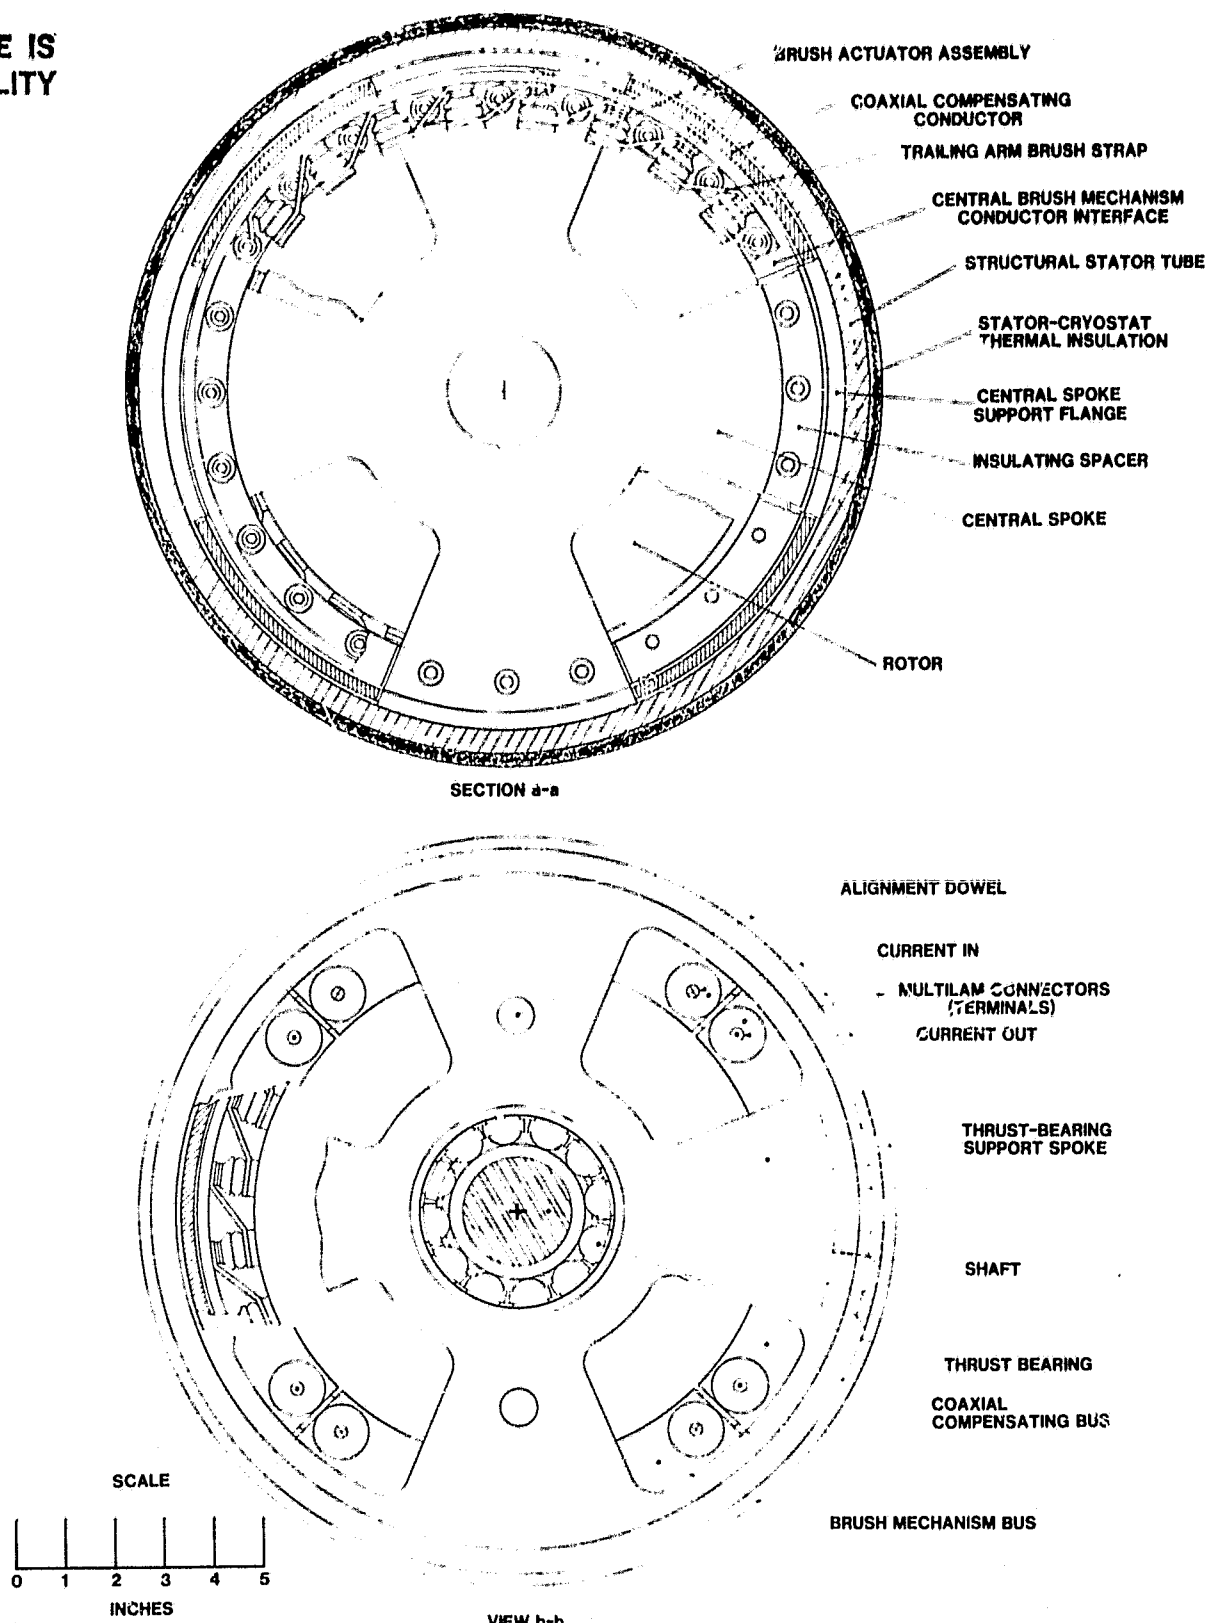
Thrust Bearing Support Structure and Machine Terminals (view b-b) and Central Bearing Support Structure and Brush Mechanism Cutaway (section b-b)
